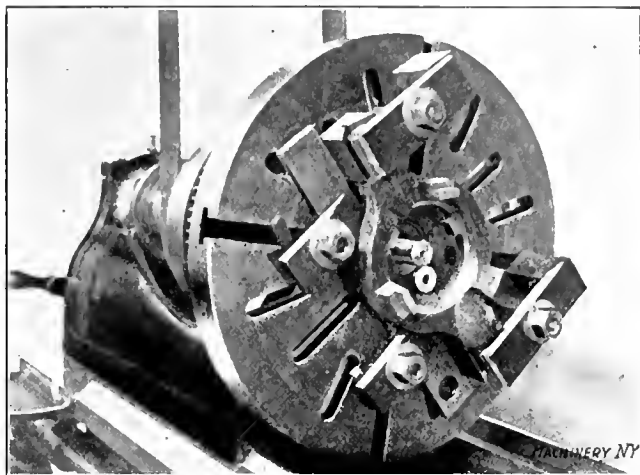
Use of Central Plug and Ring Gage for Sizing Projections located 120 Degrees apart
